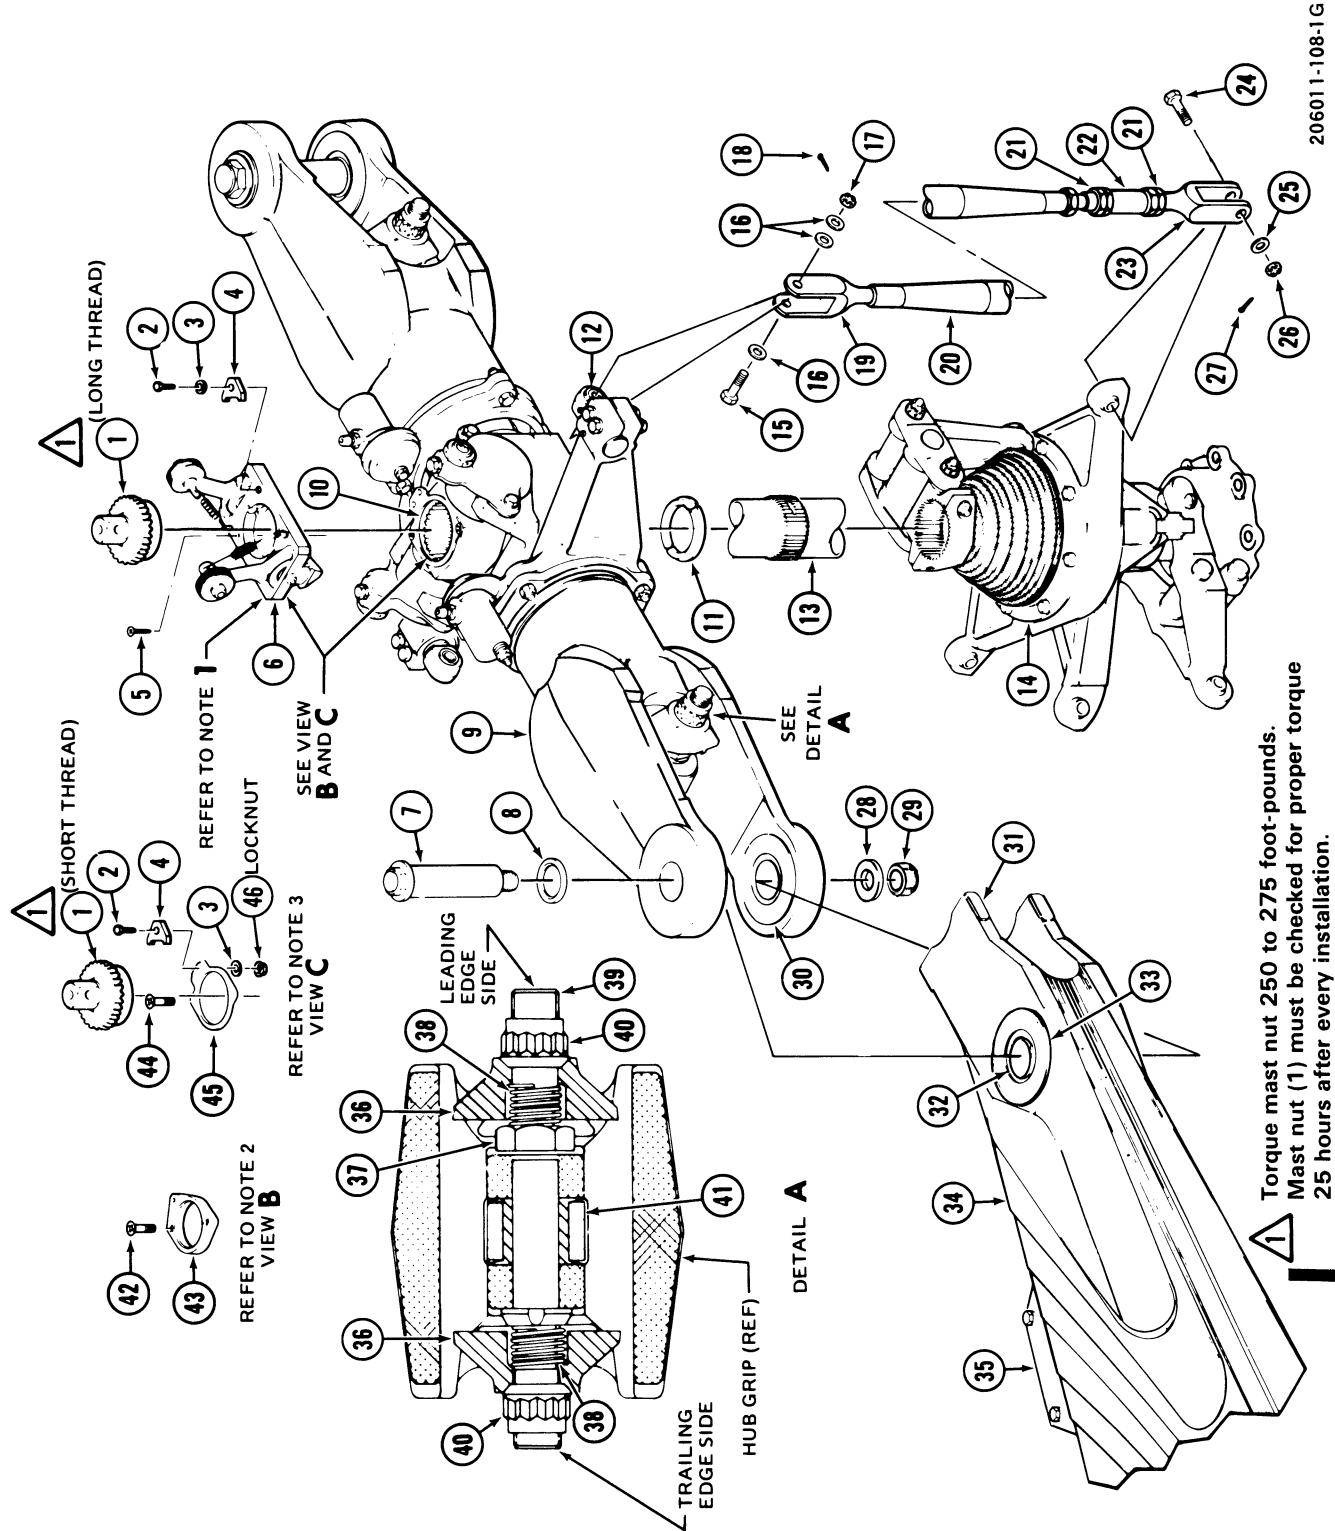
Main rotor hub and blade assembly (typical) (Sheet 1 of 2)
